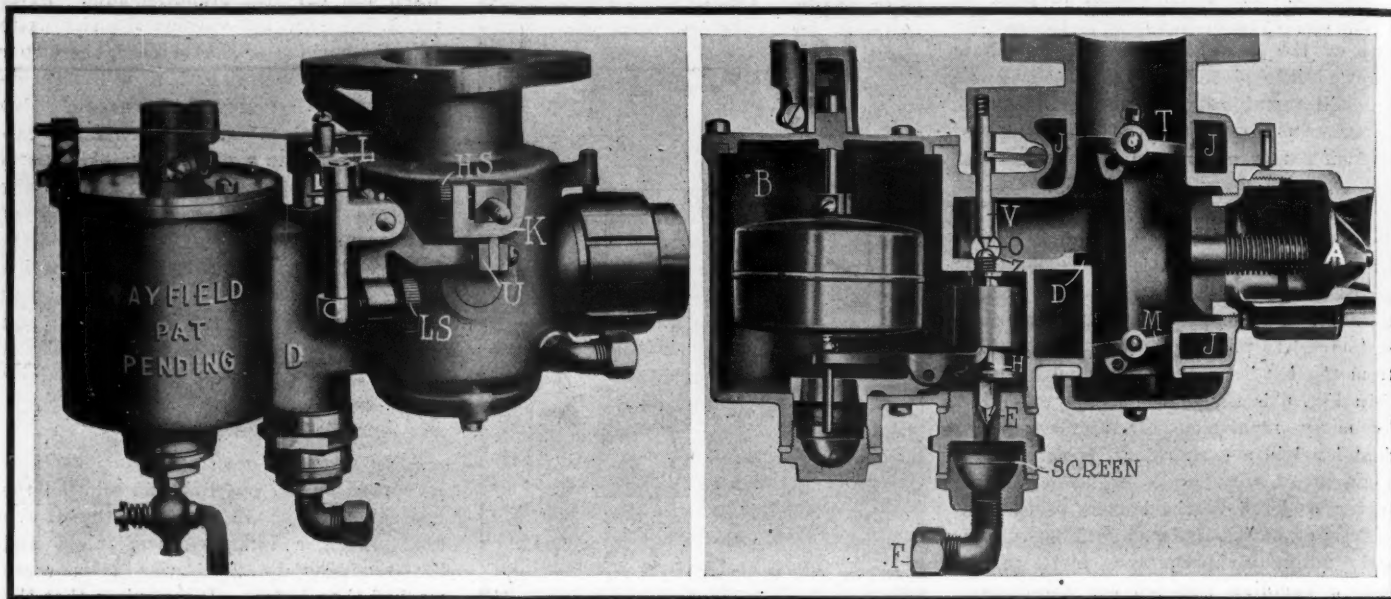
SIDE VIEW RAYFIELD MODEL H, SHOWING ADJUSTMENTS. FIG. 9—SECTIONAL VIEW OF RAYFIELD
